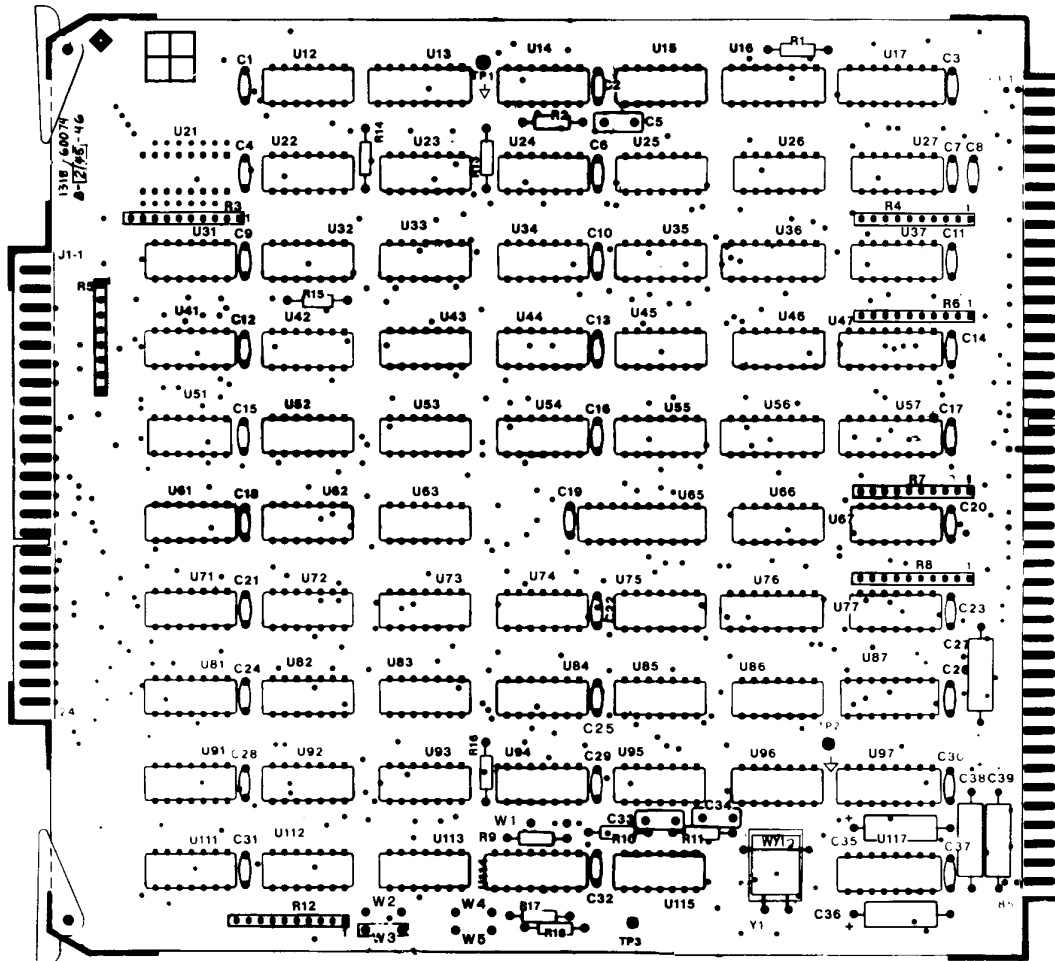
Mag Tape 1 PCA Parts Location Diagram
